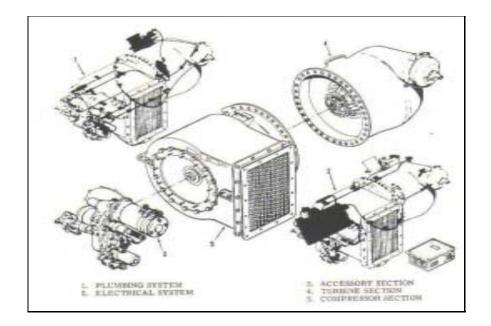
Six Basic GTC-85-72 Gas Turbine Assemblies
